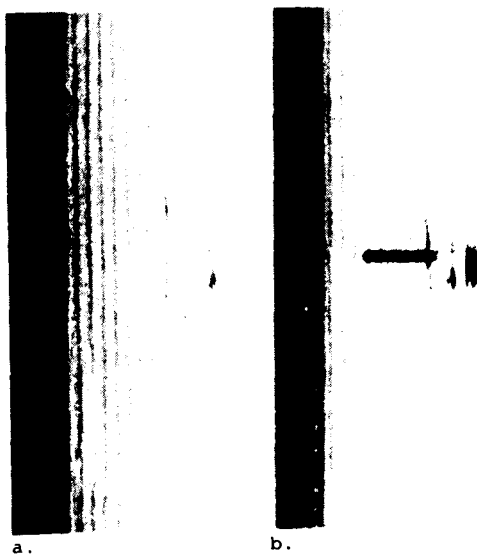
Dye penetration into impact damaged thick composites. Part a) shows the dye uptake into an impact damaged coupon. Part b) shows the same coupon with a small hole drilled to allow the dye to penetrate the interior.
